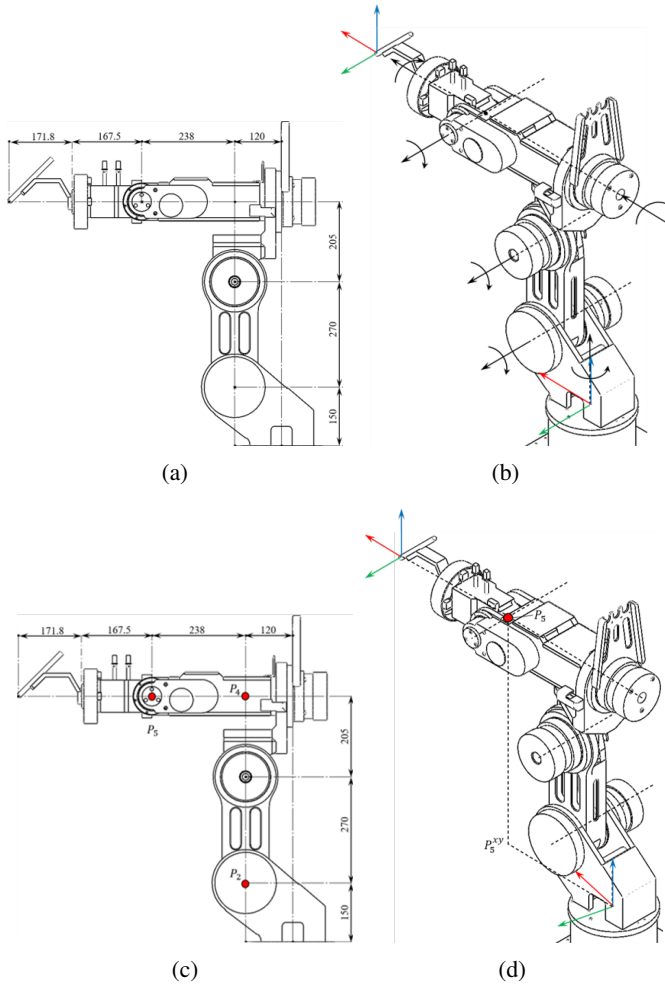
Welding Robot Arm will be considered: (a) kinematic configurations; (b) moving and fixed frame; (c) intersection points; (d) special point P_5 always rely on vertical pass through fixed origin and P_5 .
